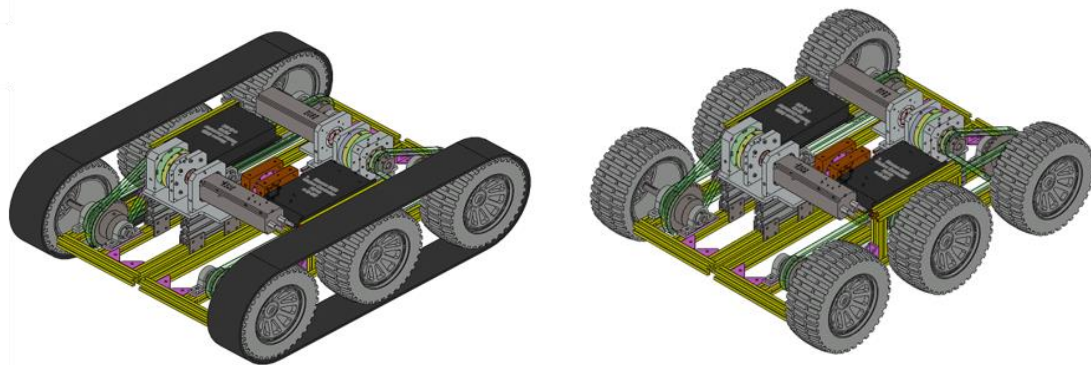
The 6-Wheel-Drive Track-Wheel Interchangeable Skid Steering SUGV
